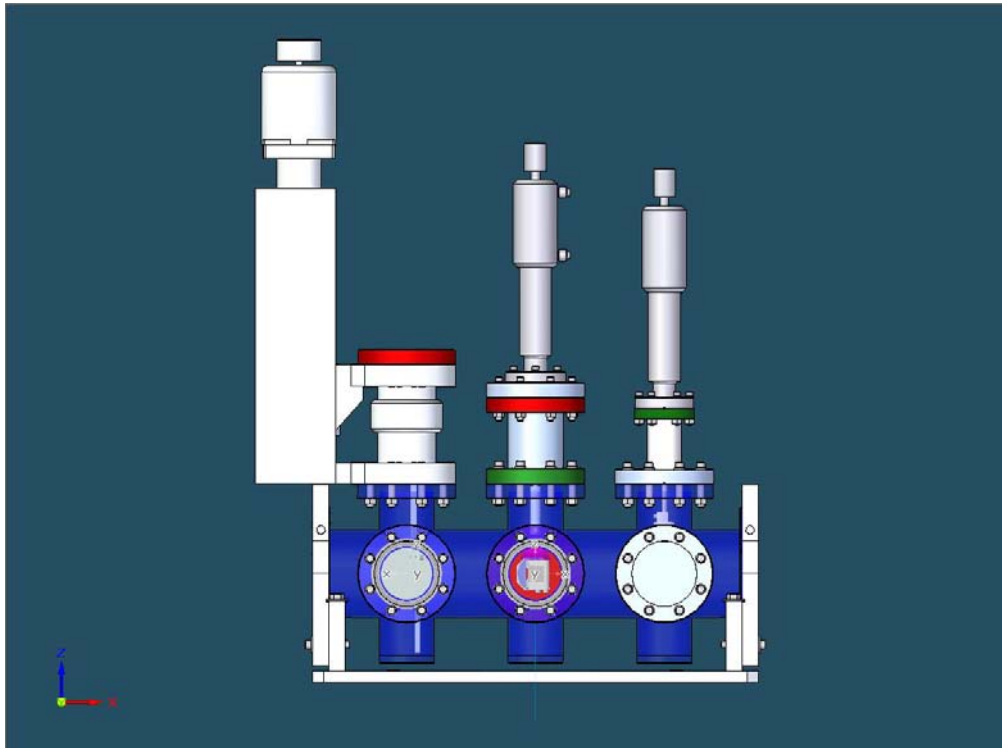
Filter Fork Holder Assembly placed in the ST-0 replacement test chamber. The Fork assembly is located in the chamber 1, furthest to the left.
